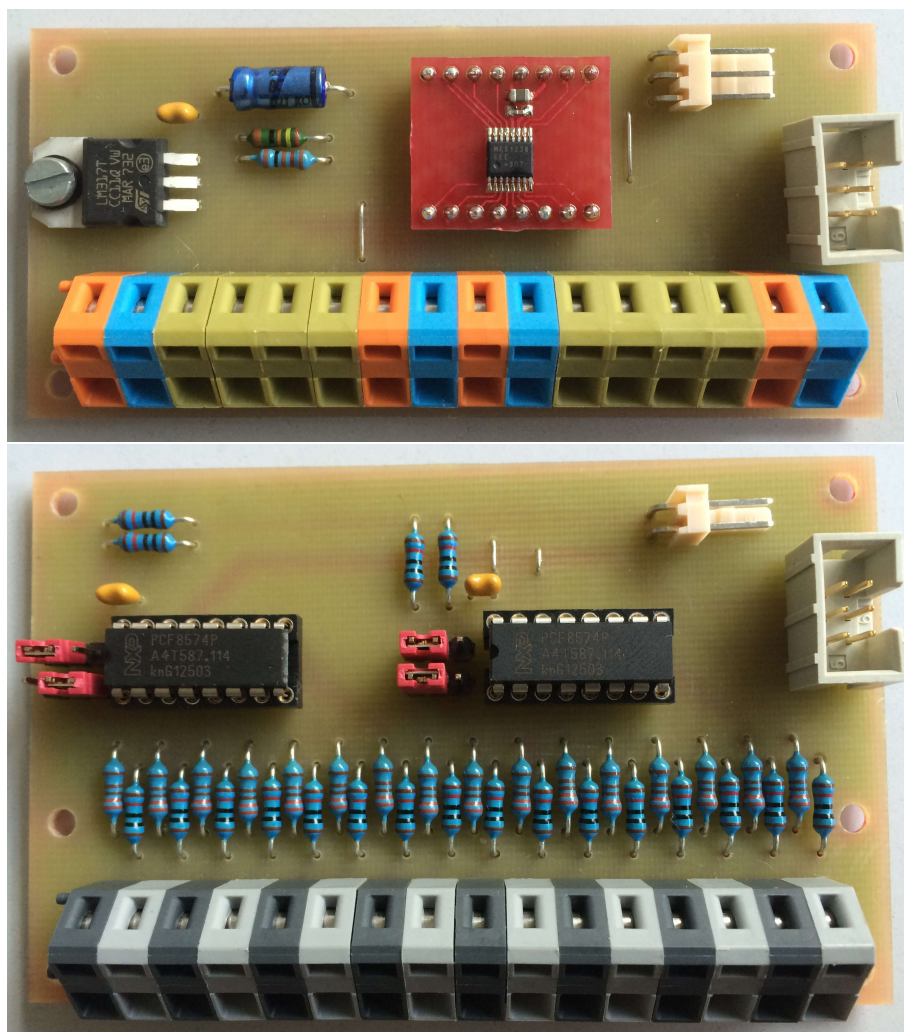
Picture of the two parts of an ADC module for gas pressure sensors. The two printed circuit boards (PCBs) are stacked together to a single component, which is connected to the power supply and I²C bus of a CAN to I²C converter. The module is able to provide +24 V for the connected gas pressure sensors. It reads the gas pressure with 12-bit ADCs (upper part) and the hardware triggers (lower part) for each channel.
